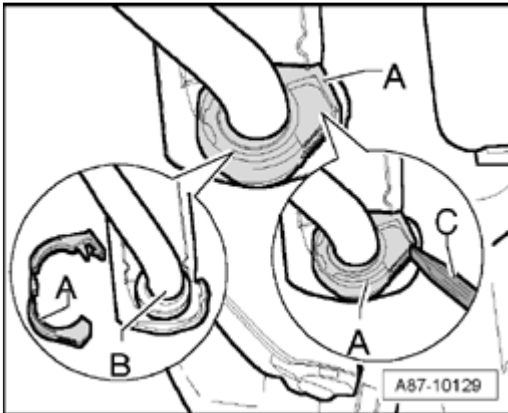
Identifying Coolant Pipes, And Plastic Clamp
